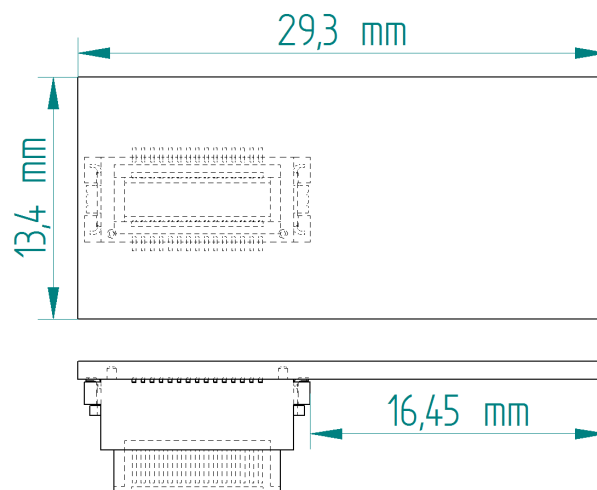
Basic extension module PCB layout: The extension connector takes up almost half of the bottom layer space.
